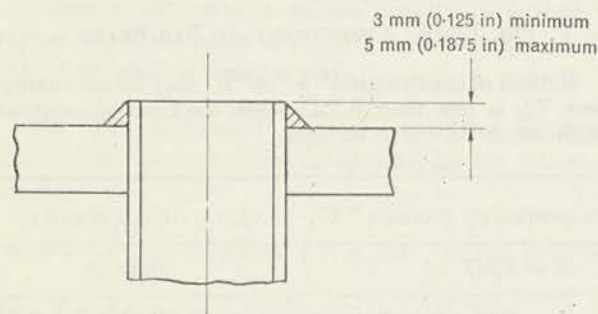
DETAIL OF SEAL-WELD FOR PLAIN TUBE
